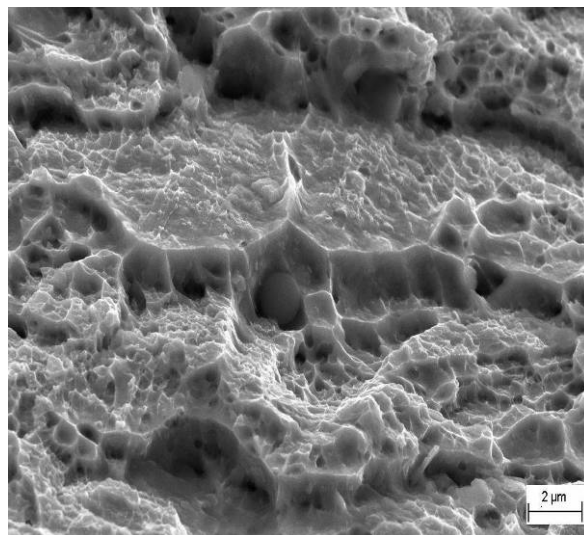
Terraces on ductile fracture of investigated steel after deformation with a draft of 33%, Mag. 16530x
